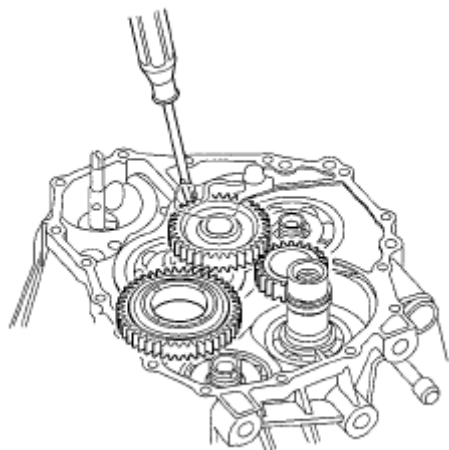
Engaging Reverse Idler Gear With Reverse Gears
